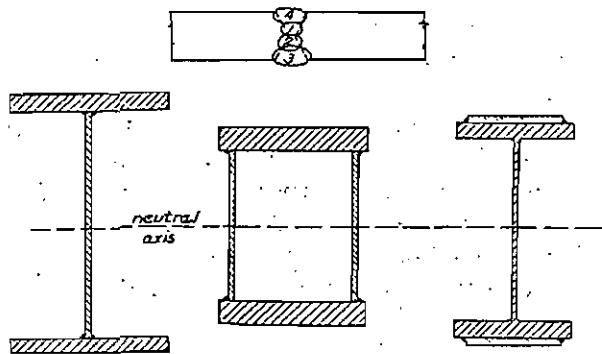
Balancing welds or weld beads about the neutral axis of the member, reduces angular distortion to zero.
